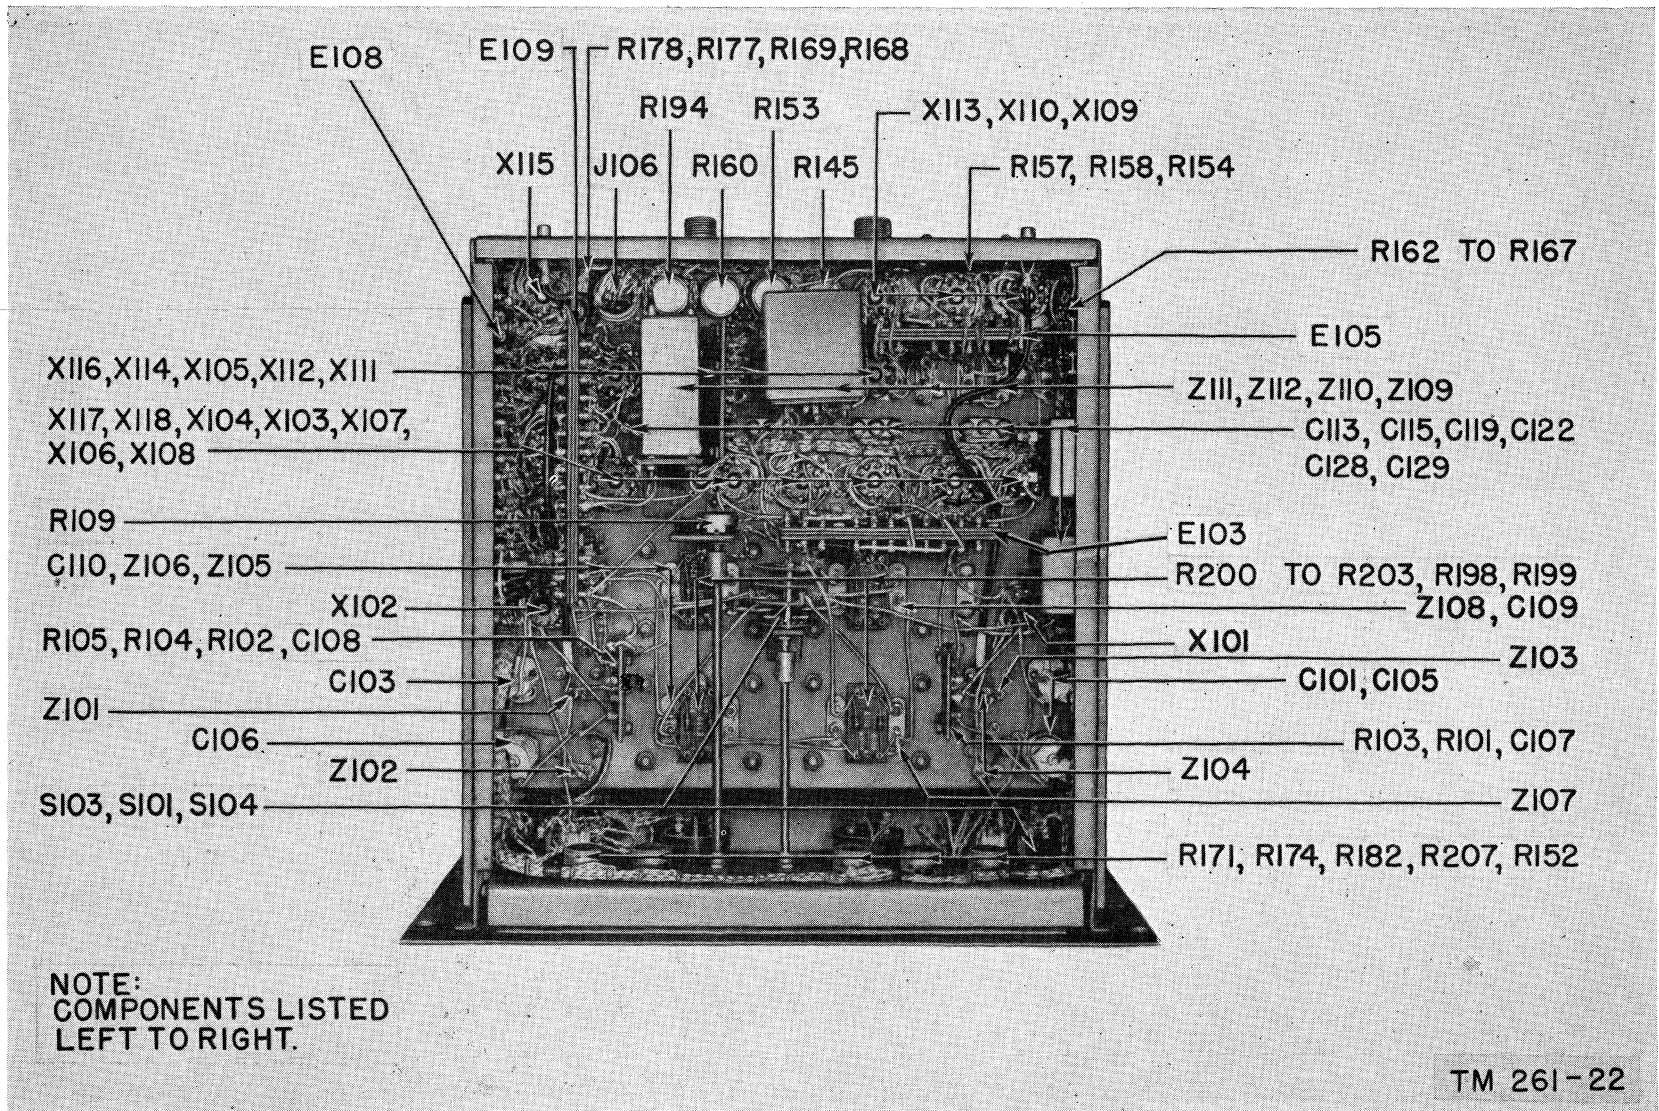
Dual Diversity Converter CV-31/TRA-7, bottom view of chassis.
